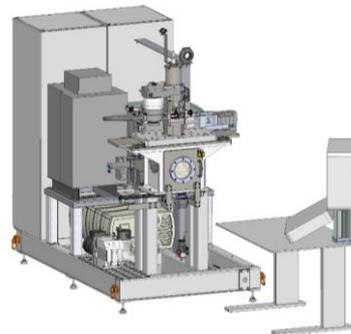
Evobeam Cube 400 welding unit manufactured by Evobeam.
